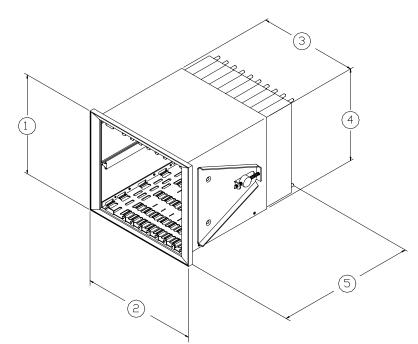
Dimensions of a Panel Mount 3500 Mini-Rack
